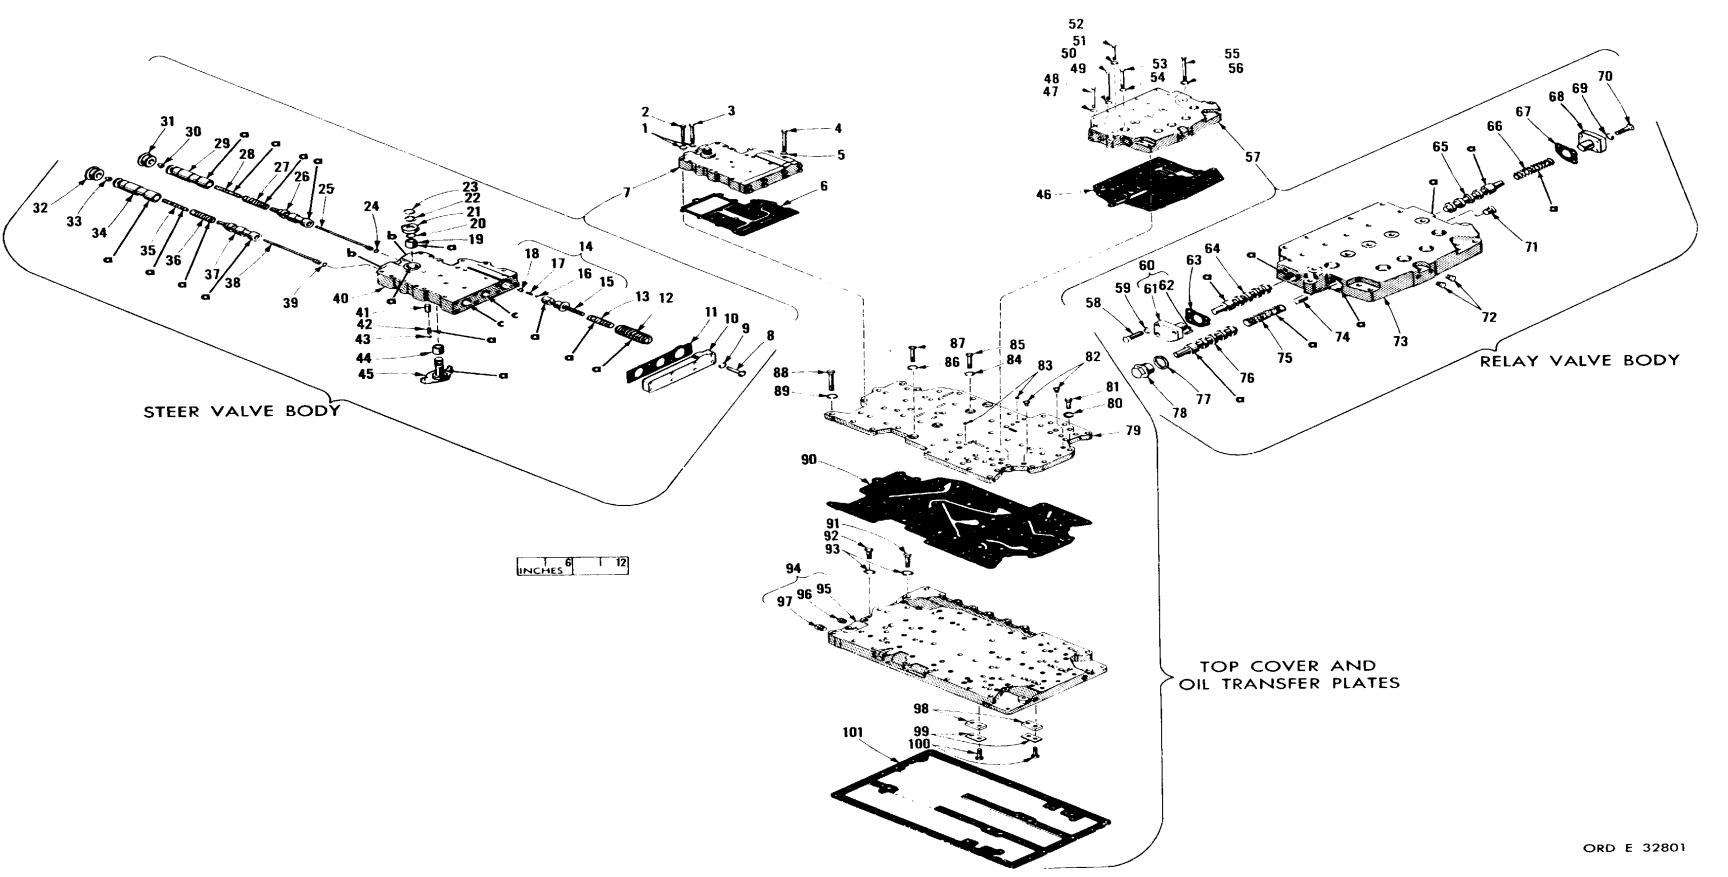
Fold-out 11 — Steer, and relay valve body assemblies exploded view
